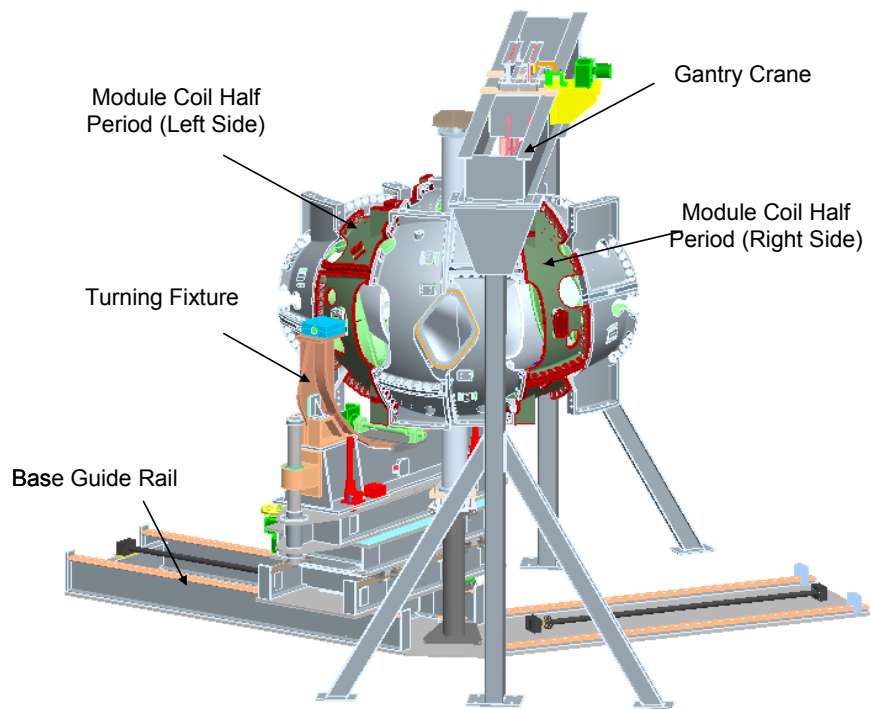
Reference Design Modular Coil Assembly Fixture
